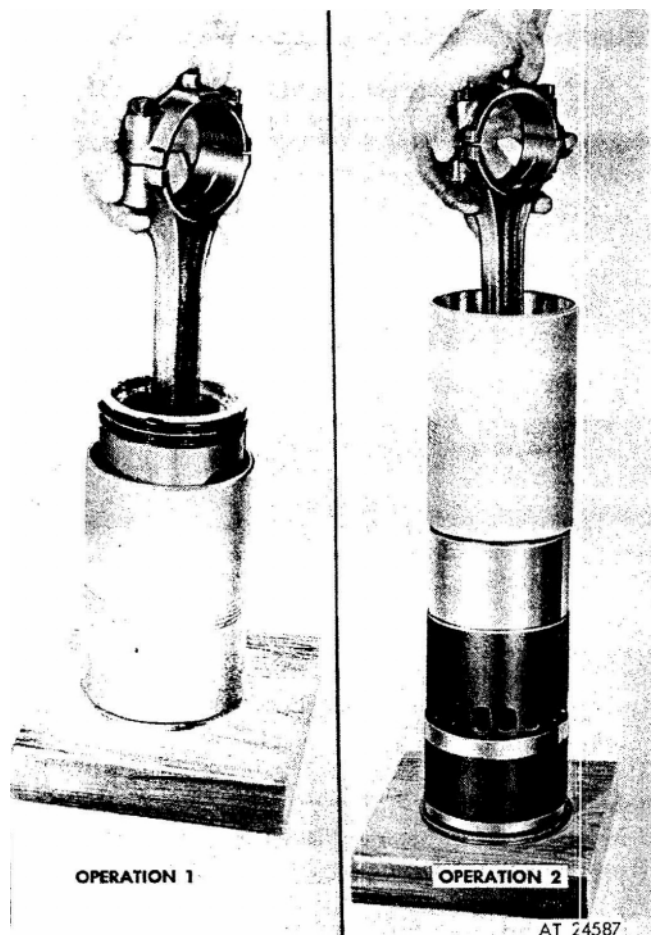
Installing piston and connecting rod assembly in ring compressor and cylinder liner.
